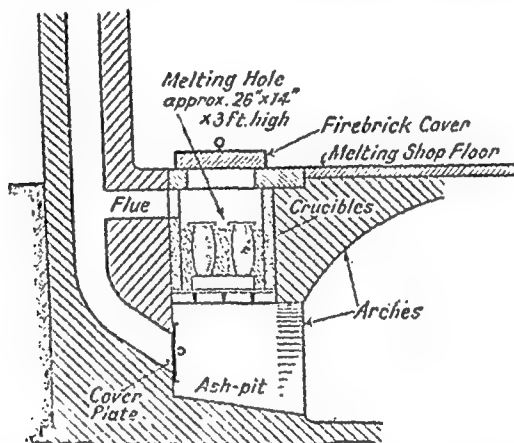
Section through a Melting Hole for Crucible Steel Making.
